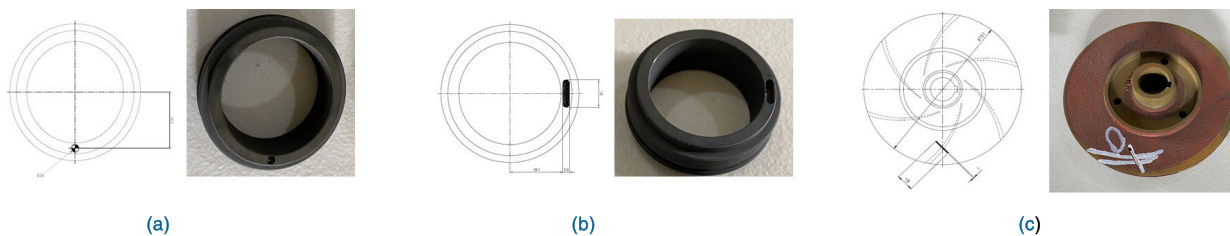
Mechanical faults seeded in the CP (a) Mechanical seal hole defect (b) Mechanical seal scratch defect (c) Impeller defect.
